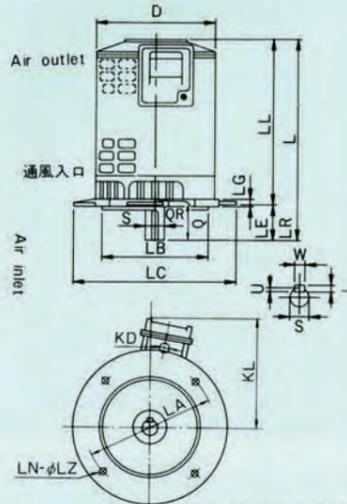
Frame Nos 90L ~ 100L (Bracket tightening bolts for 6-pole and 8-pole machines are located outside the frame)
